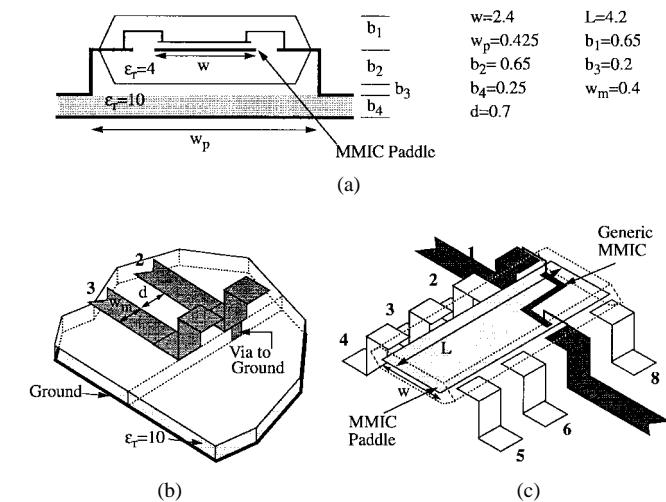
Plastic package dimensions and geometrical details. All dimensions are in millimeter. (a) Package section. (b) Detail of the grounding to the motherboard. (c) MMIC mounted on the plastic package.
